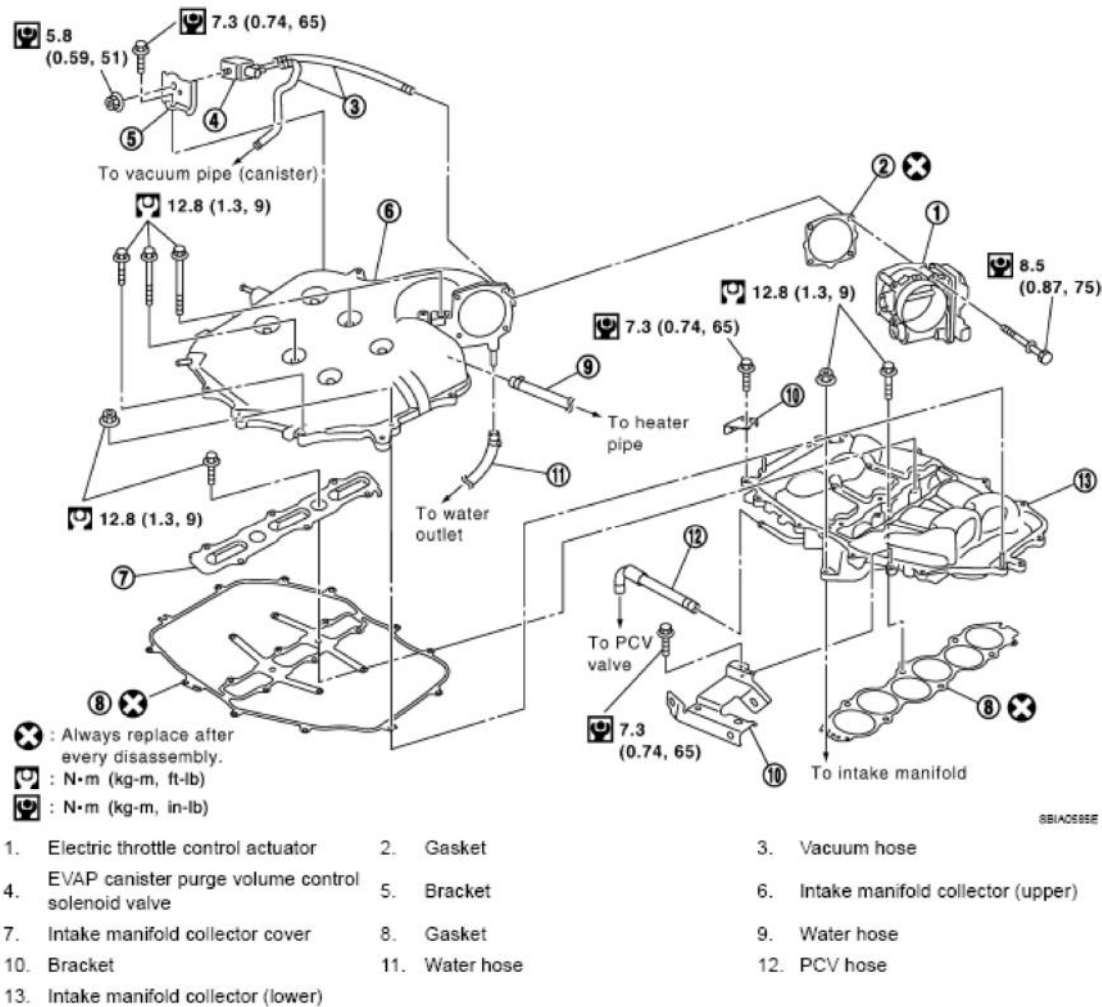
Identifying Intake Manifold Collector Components With Torque Specifications
